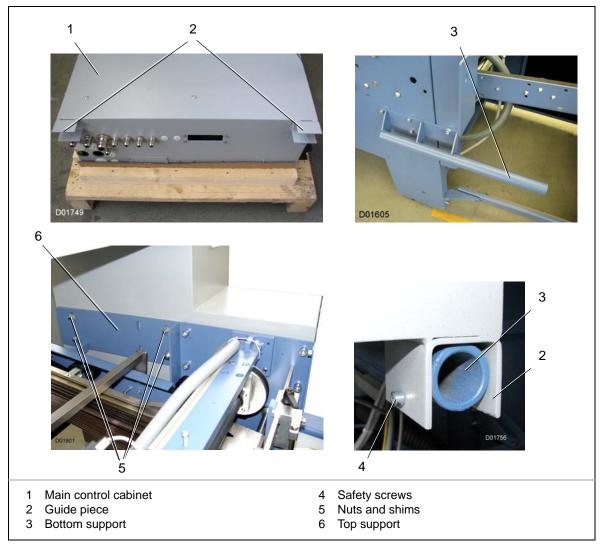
Main control cabinet assembly, NAVIGATOR Control
